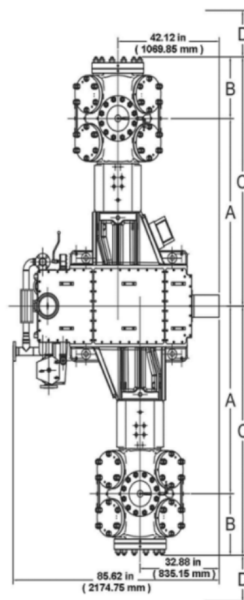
Dimensions of the reciprocating compressor for the process [8]
